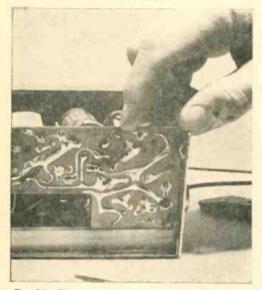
Finger points to short piece of wire used to bridge broken spot in printed circuit wiring.
